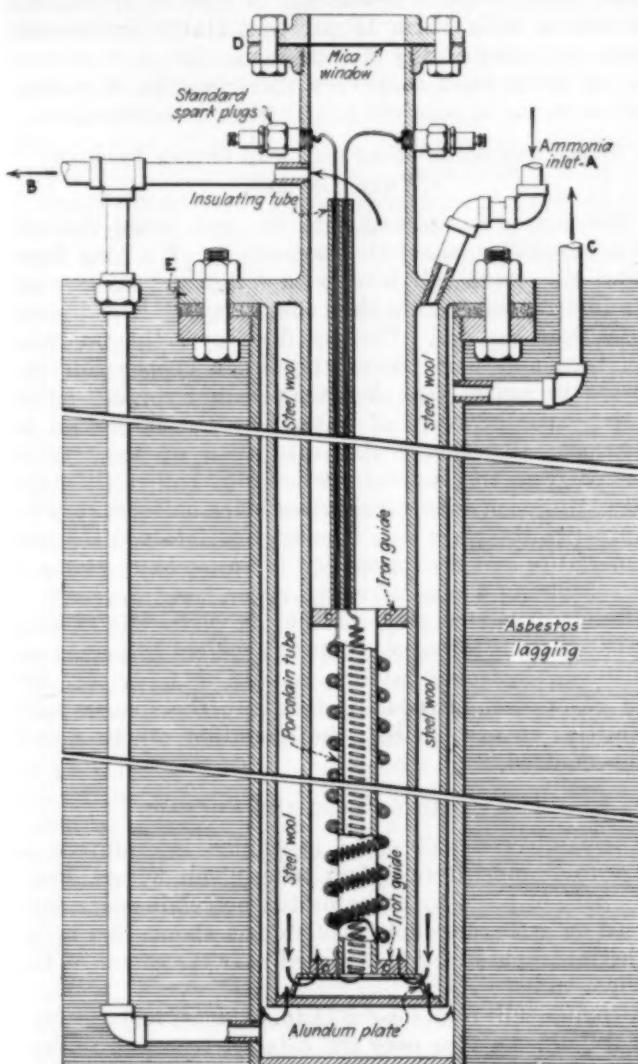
SECTION THROUGH AMMONIA CRACKER
